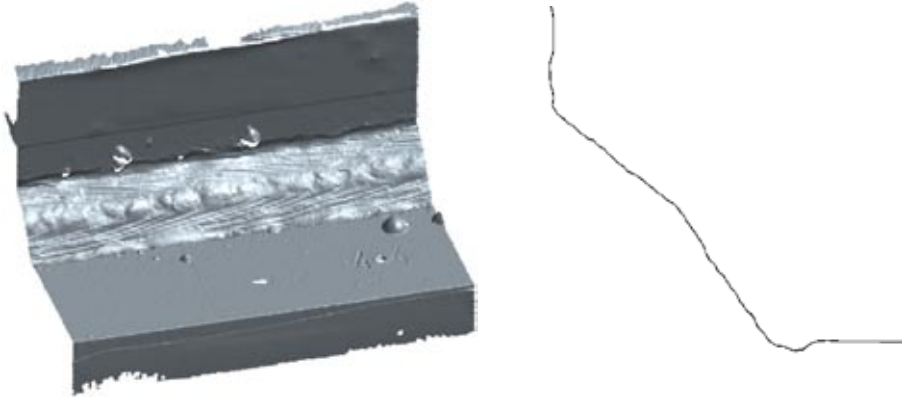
A picture and a cross section of the weld geometry of a welded joint from a vision system for local weld geometry measurement.
